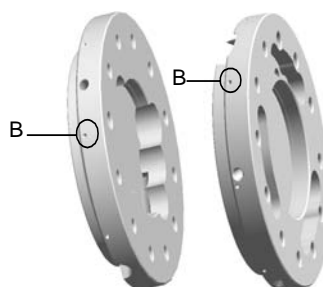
Seven holes B, on a radius of x mm from axis 6 center on the two insulated tool flanges.
